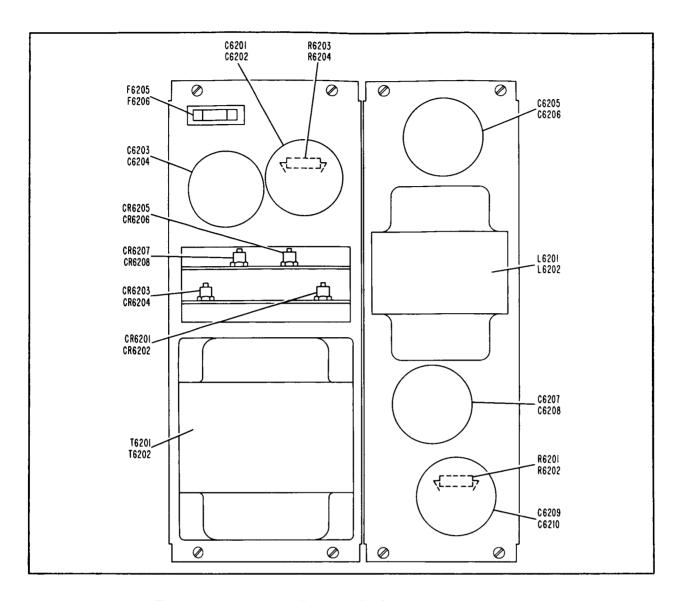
Power Supply Unit and Filter Unit, Parts Location
